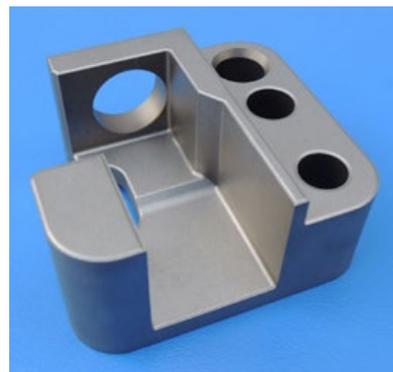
Parking lock mechanism (Courtesy JPMA)
